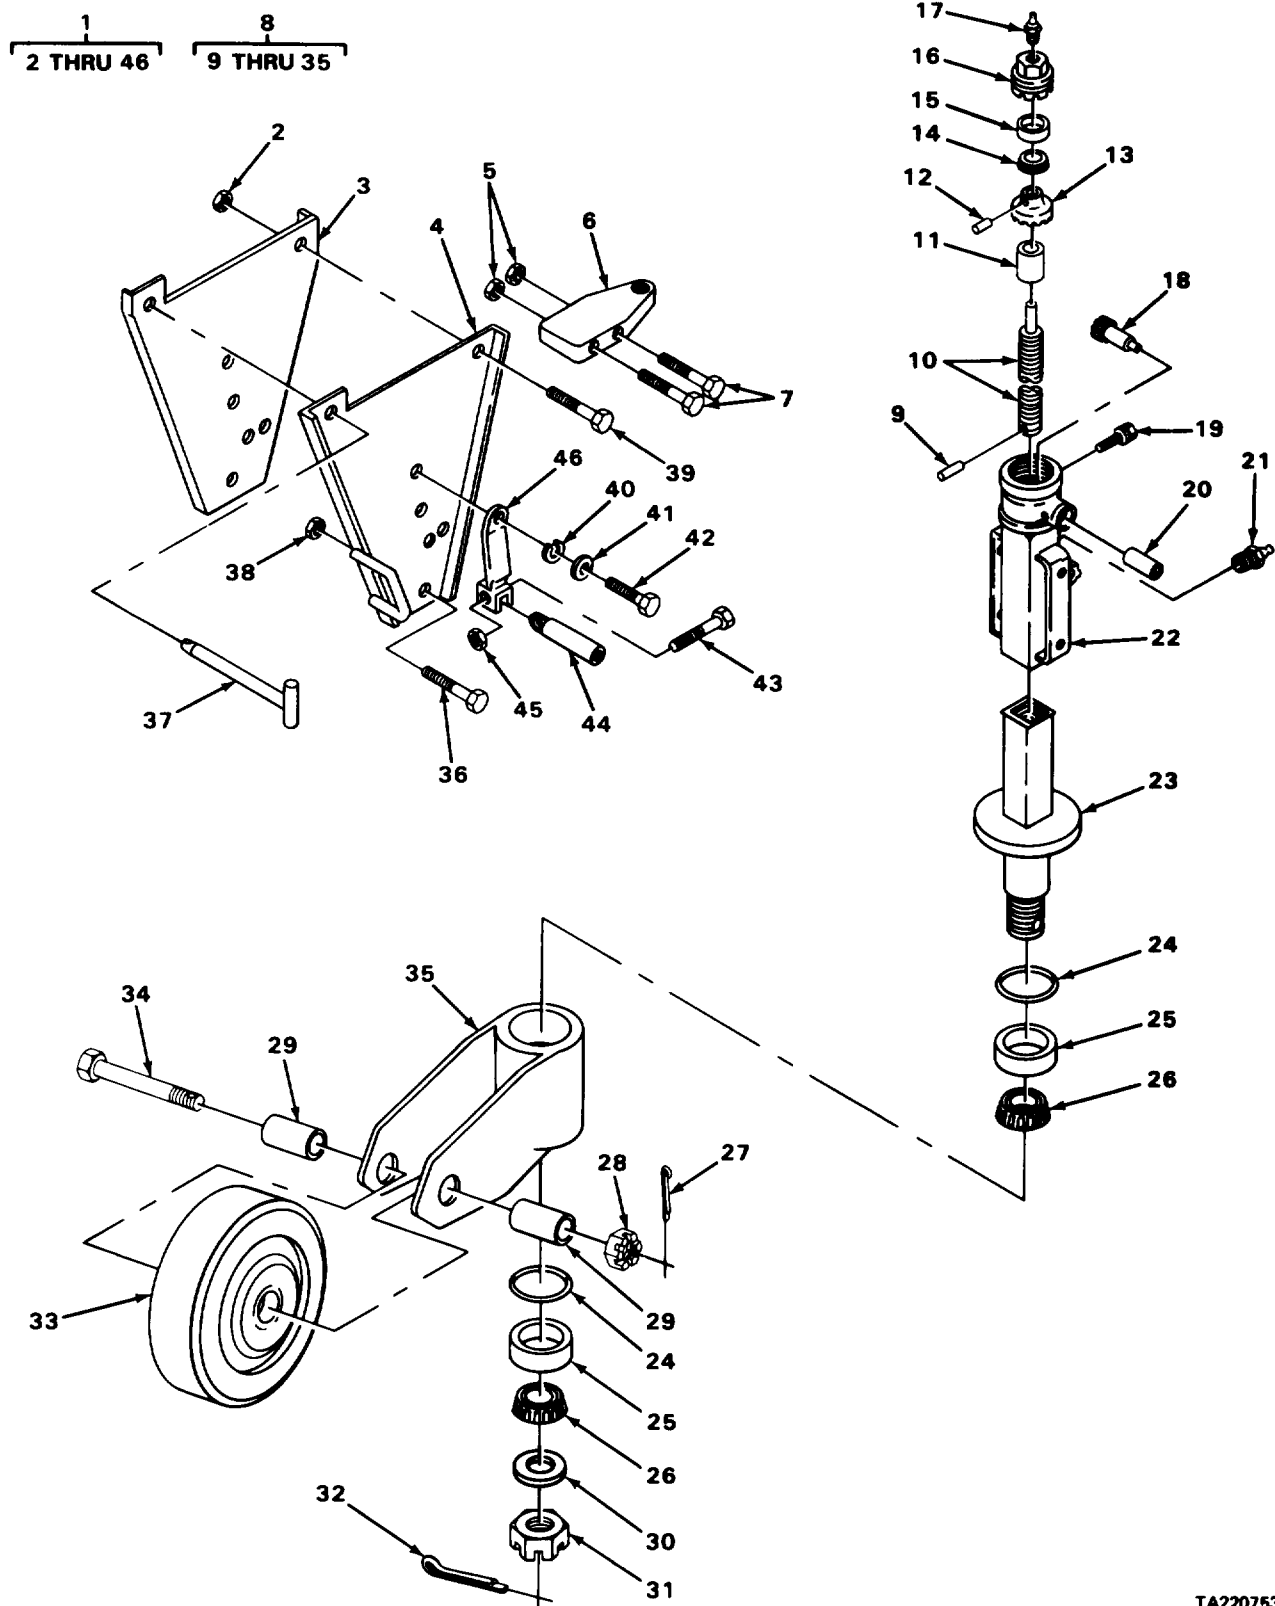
SPARE WHEEL STOWAGE ASSEMBLY.
